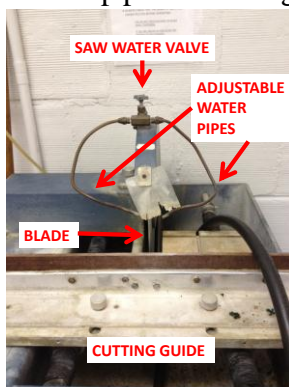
Saw components. Be sure that saw blade slides nicely into slot of cutting guide (not shown here).
